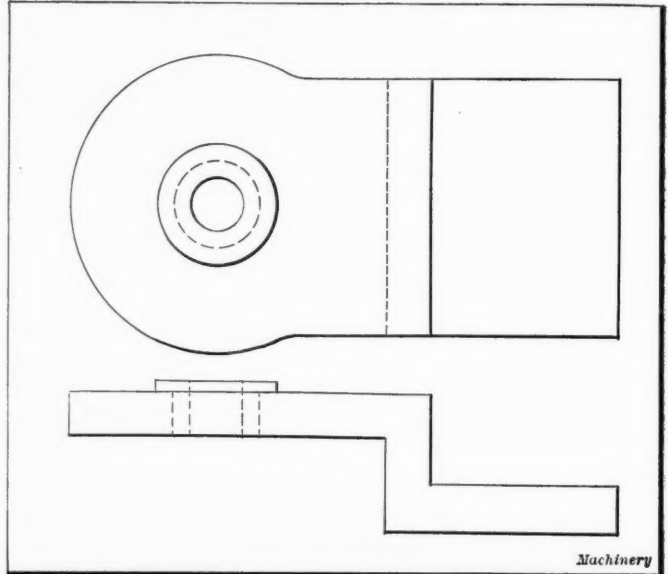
The Bracket that was used to support the End of the Boring-bar when boring the Holes in the Bearing Posts
